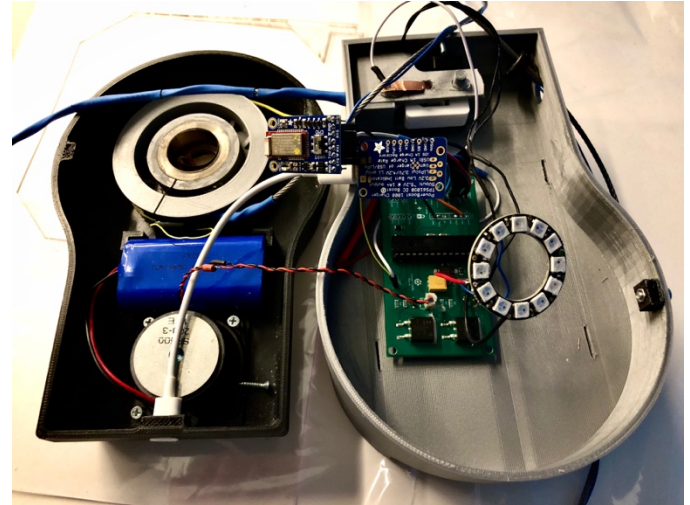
The PCB fully assembled and within the mechanical housing shown during the Showcase, complete with the solenoid, lock, and cable reel
